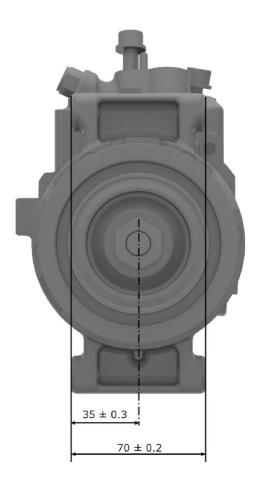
Dimensions of air conditioner compressor DENSO-7SEU17 with pulley diameter 100 mm (side view)
